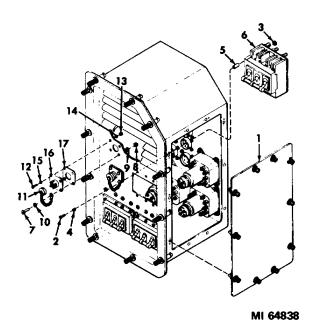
Components of the hydraulic test console lower section-partial exploded view (part IV).
